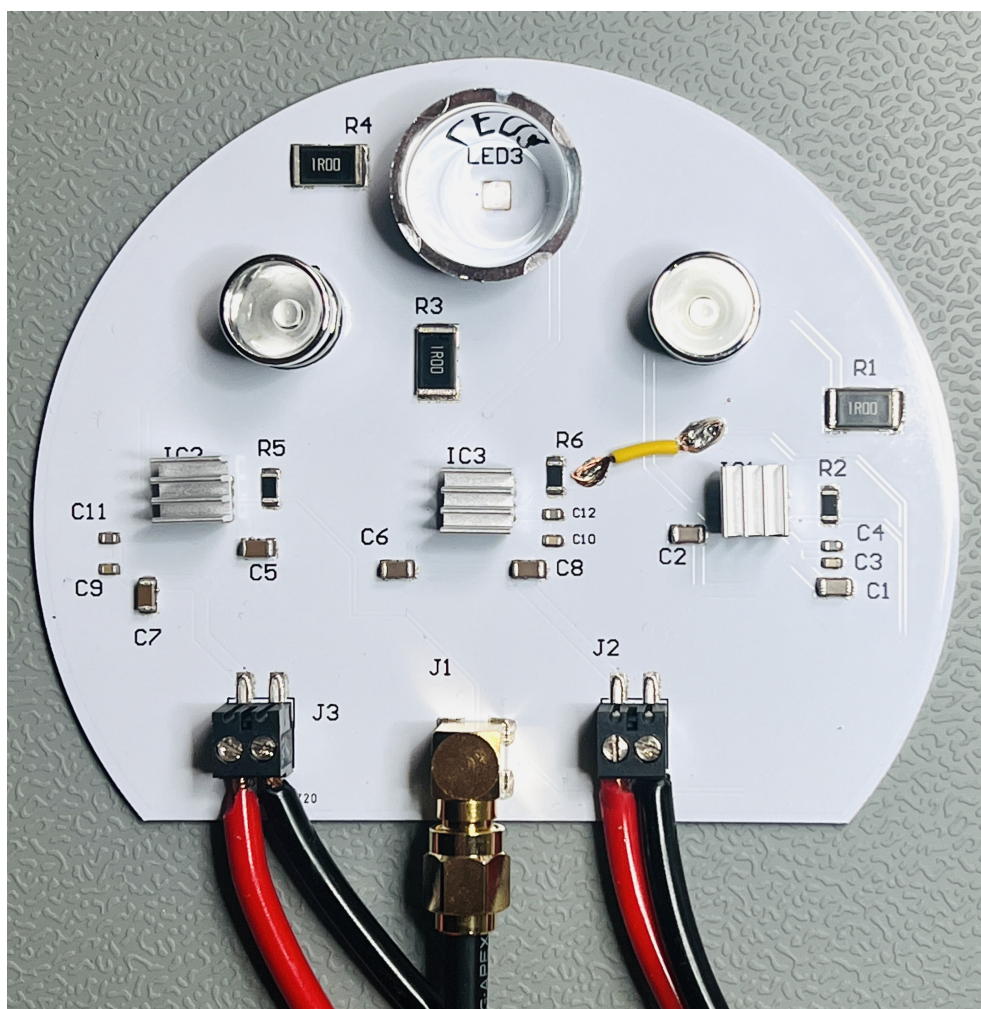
Final assembled UWOCS emitter board with their optical concentrators
